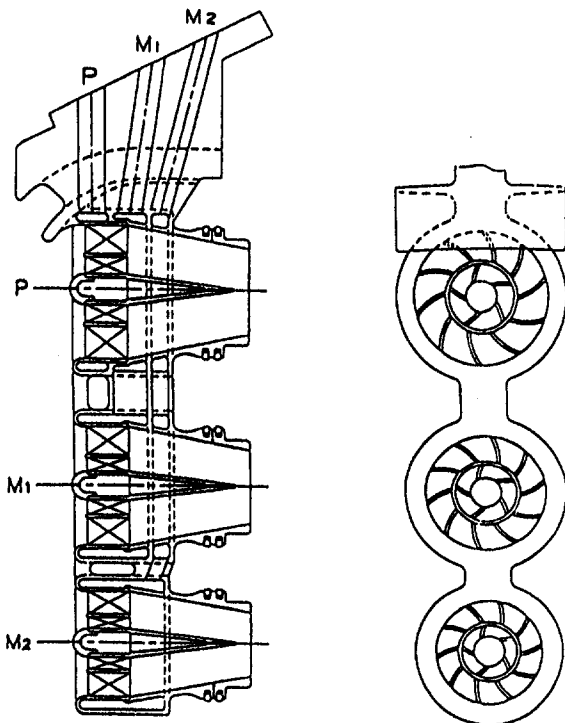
Fuel nozzle assembly for LM6000 dry low- NO_x combustor
